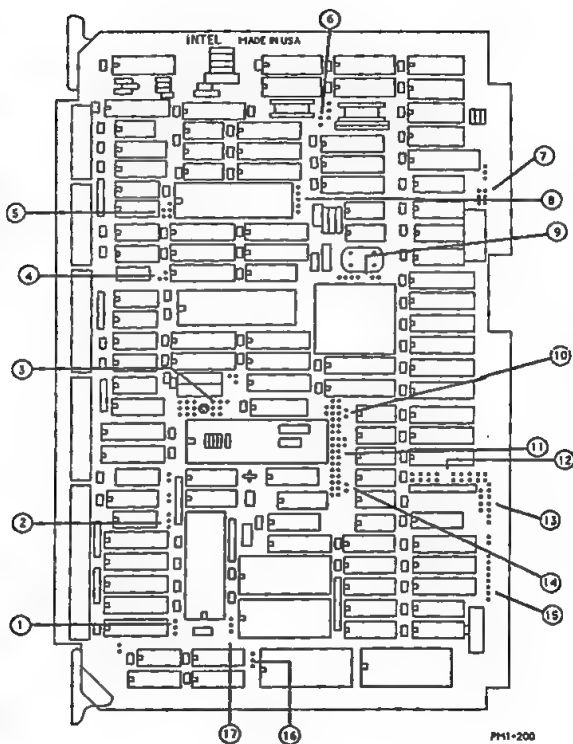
iSBC® 214 Controller Board Jumper Locations
